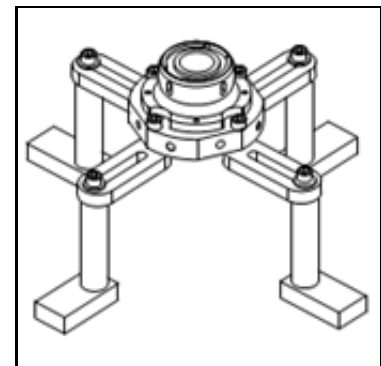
UNIVERSAL SPHERICAL BEARING MOUNT
